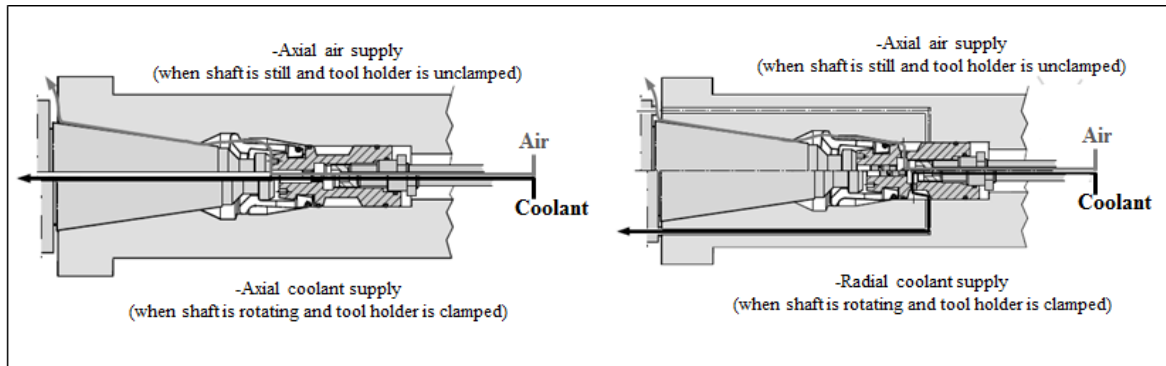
Media supply possibilities through the drawbar Adapted from (OTT-JAKOB Spanntechnik, 2013, p. 21)
